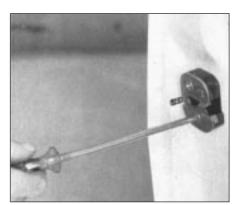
Removing door lock fixing screw (Sec 12)
